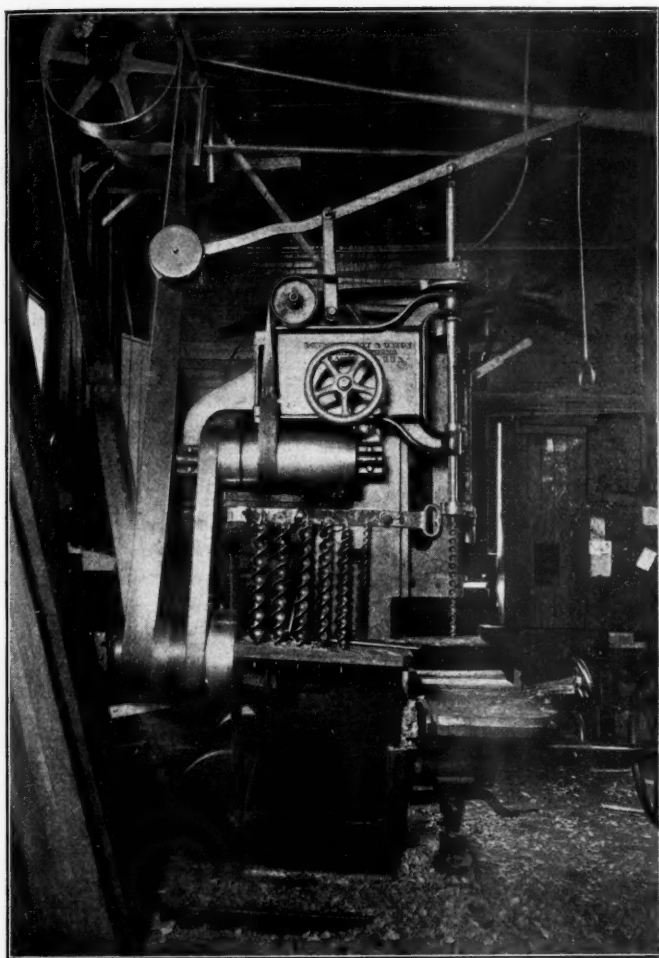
Note Projecting Head of a Set Screw on the Spindle.
